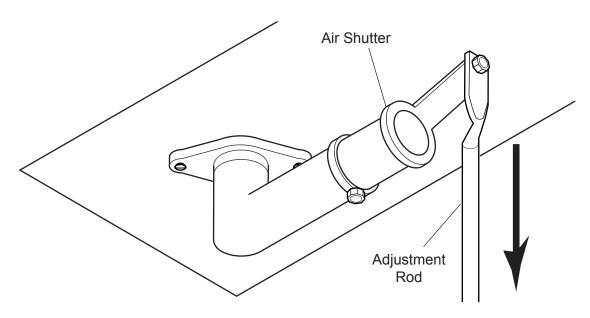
Pull Adjustment Rod Down to Open Air Shutter
